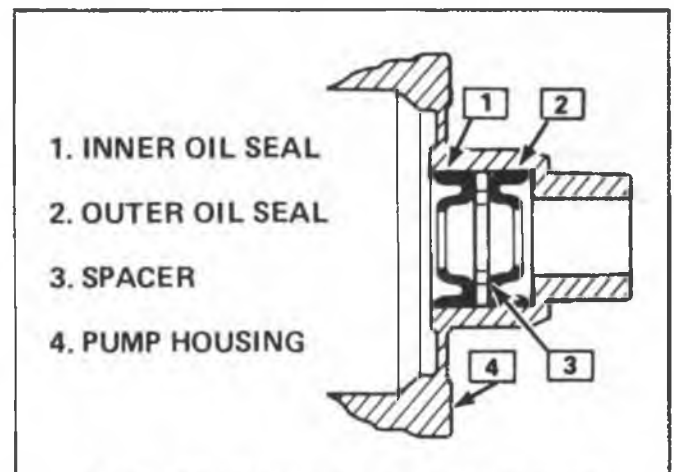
Lucas CAV Drive Shaft Seal Cross Section
